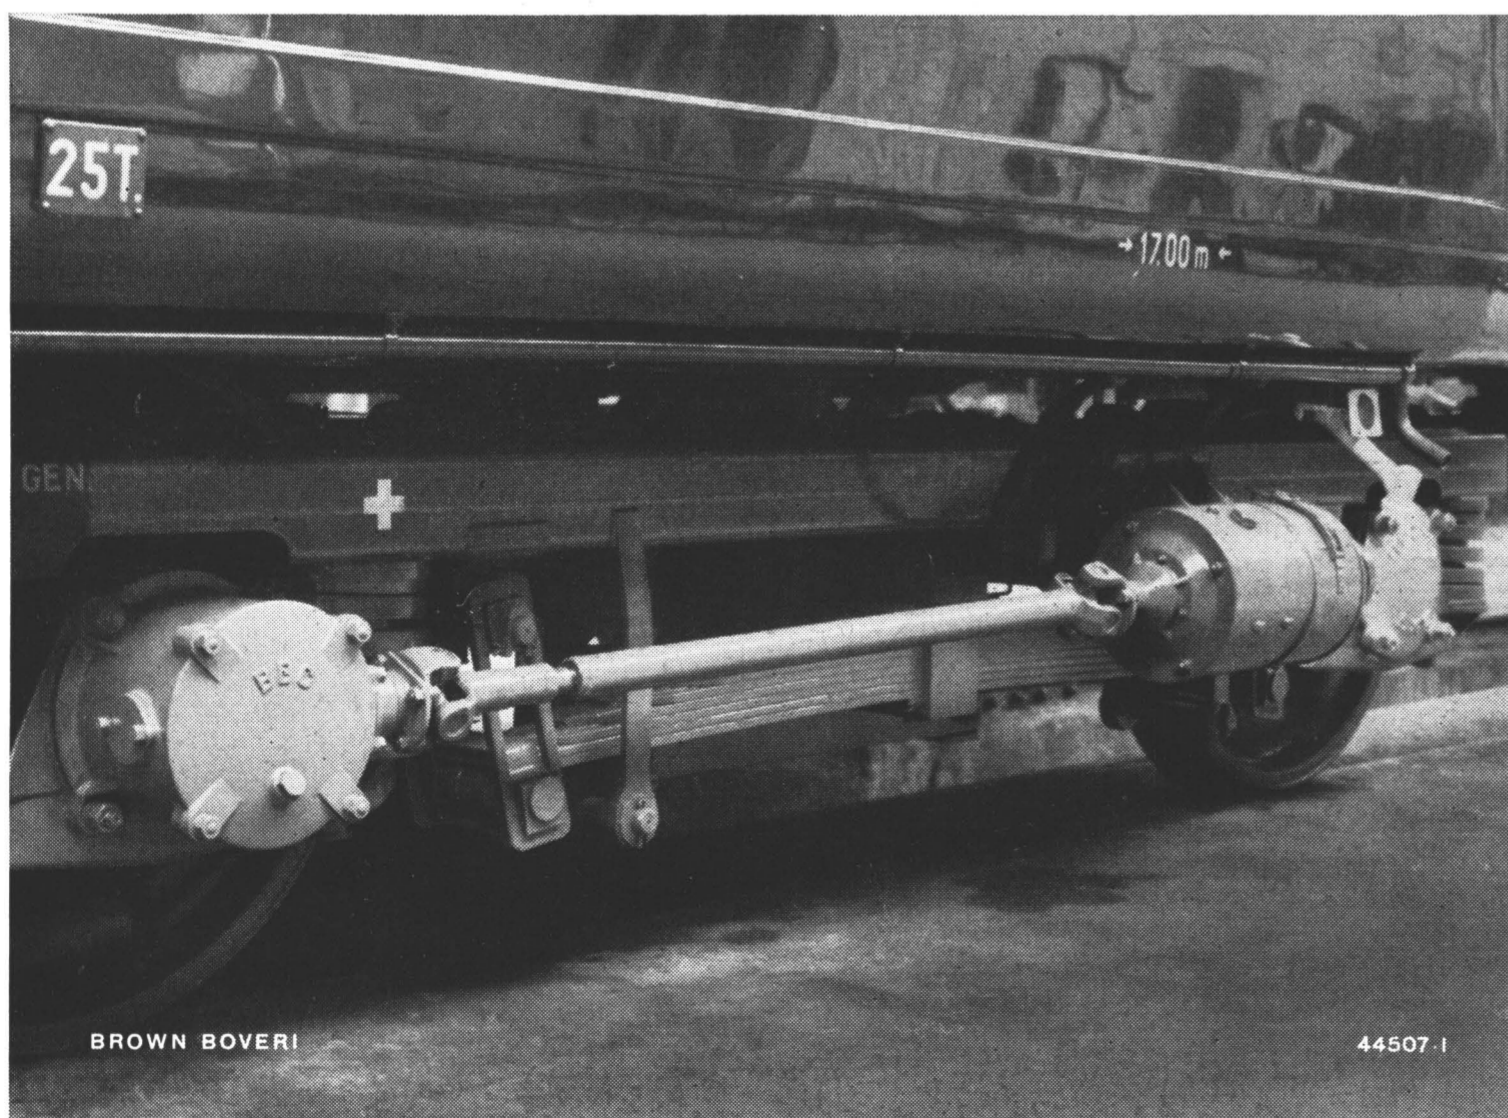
Cardan drive for train lighting generator type GZ 54 a comprising axle box gearing with single ratio of 1 : 3.125 and cardan shaft with ball and socket joints and sliding piece.
